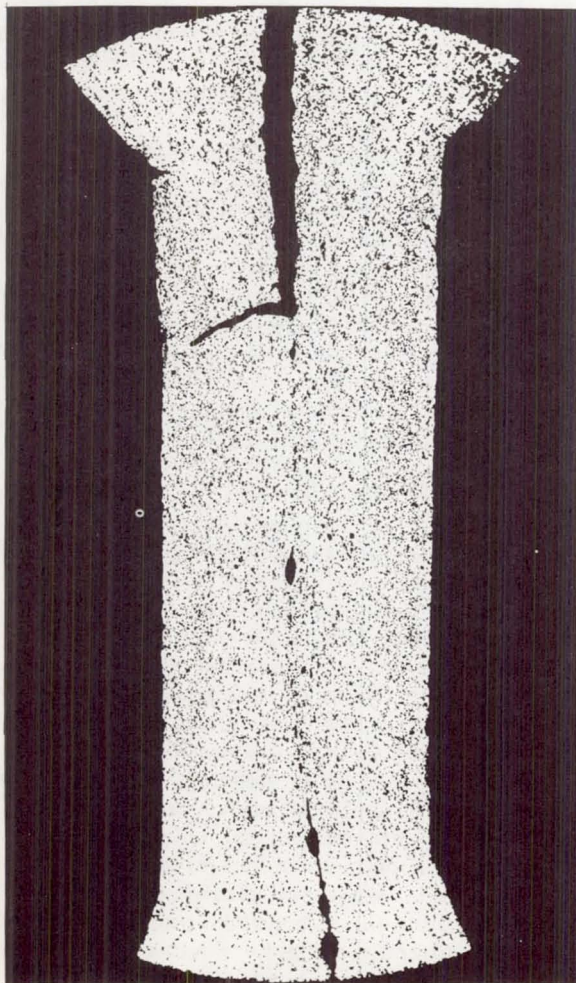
Cross-section of Cold Weld in Final Leak Area
